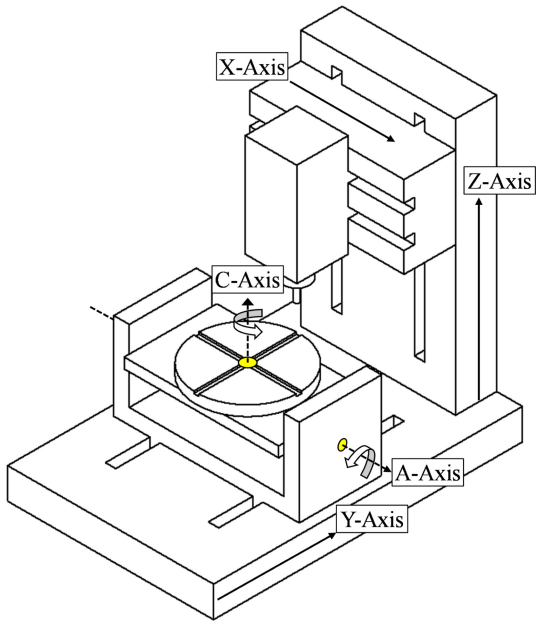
Schematic of a rotating/tilting table of a TRT-CA type machine tool
